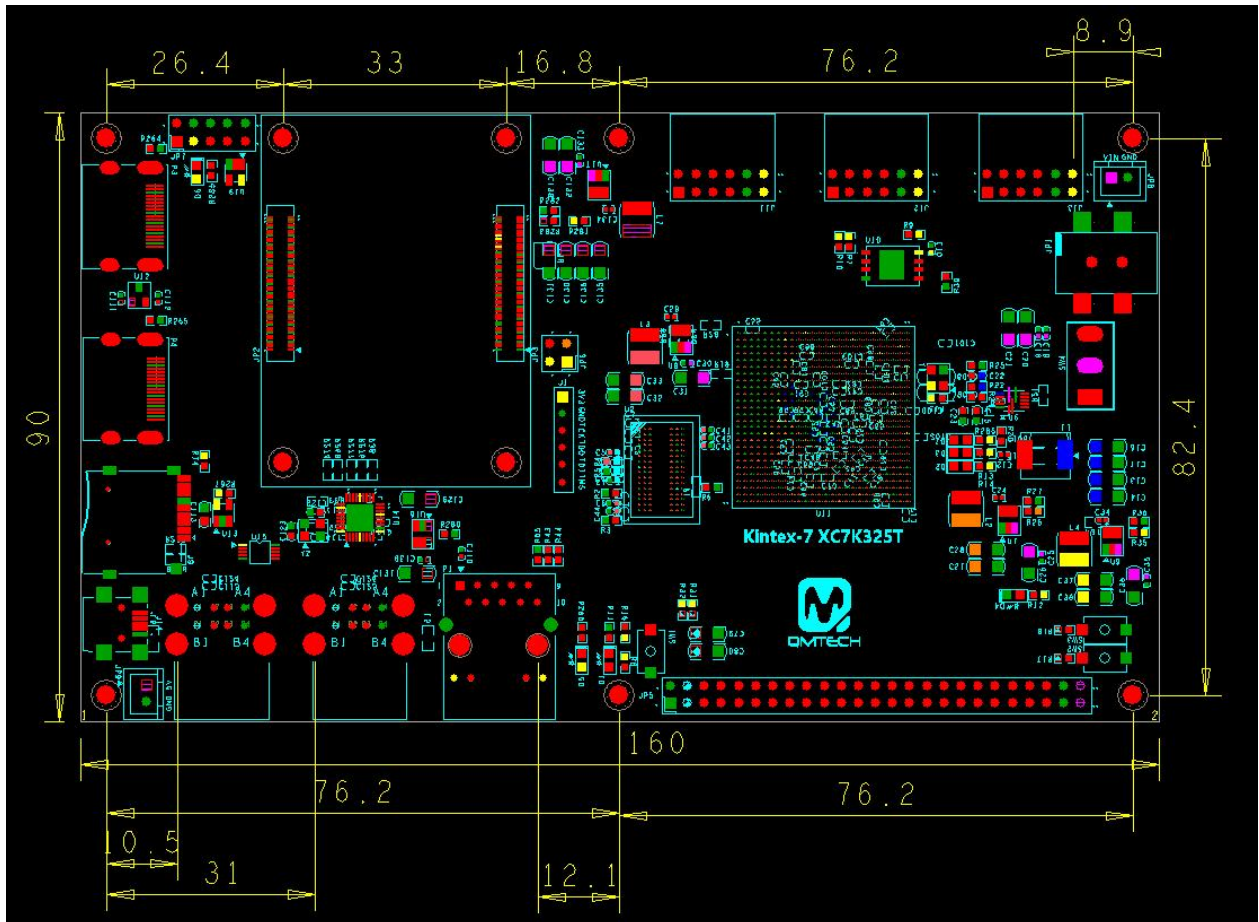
QMTECH XC7K325T Development Board Dimension
